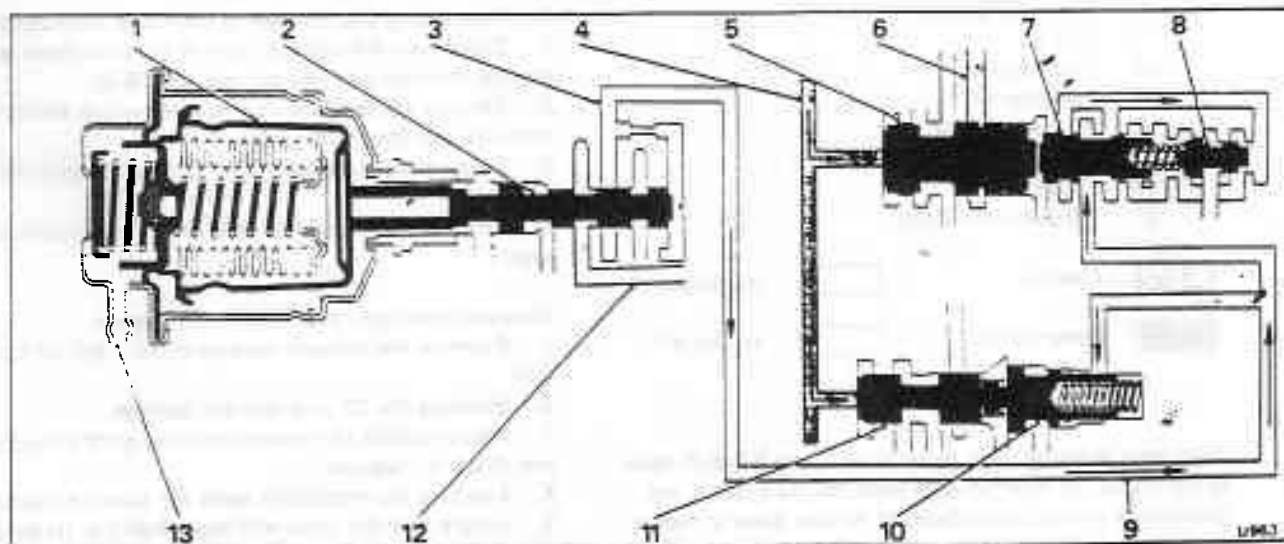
Vacuum modulator and valve showing modulator pressure
